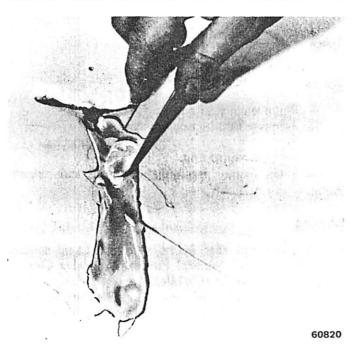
L-8 Applying Structural Adhesive to Fractured Area
